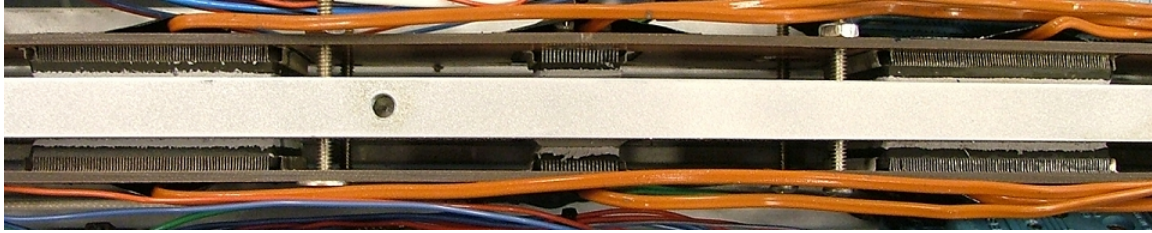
PCBs Mounted to Cold Plate using Thermal Interface Material
